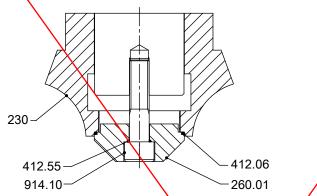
Impeller fastening elements M100 × 2 (for hydraulic systems K 500-632, K 500-640)
